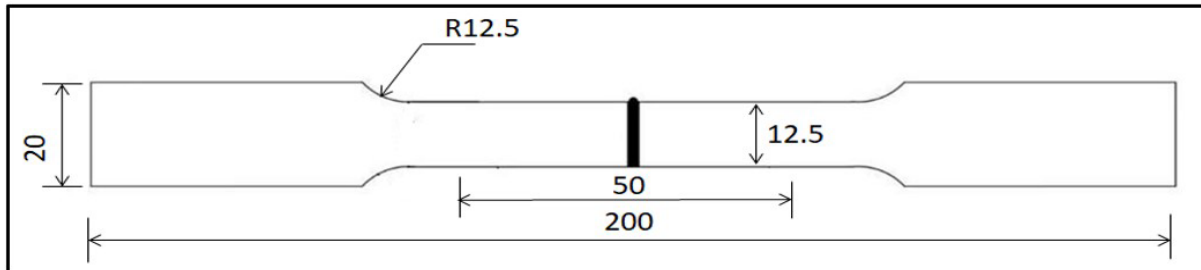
Dimensions of the welded-joint tensile specimen.
